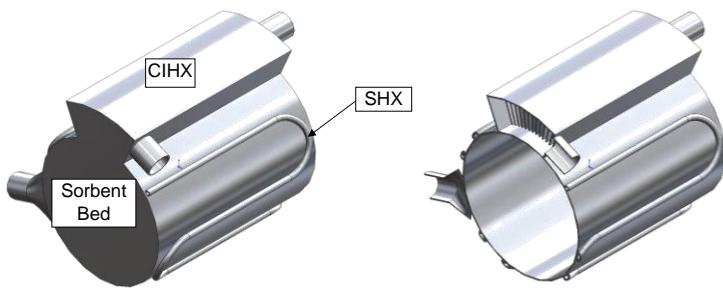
MTSAS EDU Design (Left) MTSAS, assembled. (Right) front end cap removed
